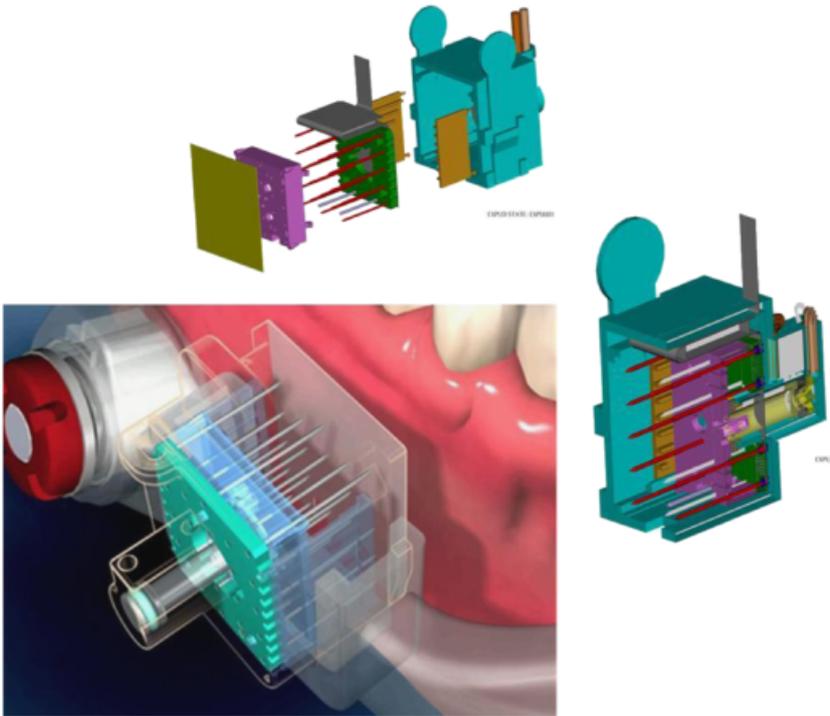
Exploded drawing of the array of micro-needles, which is embedded in a cartridge.
